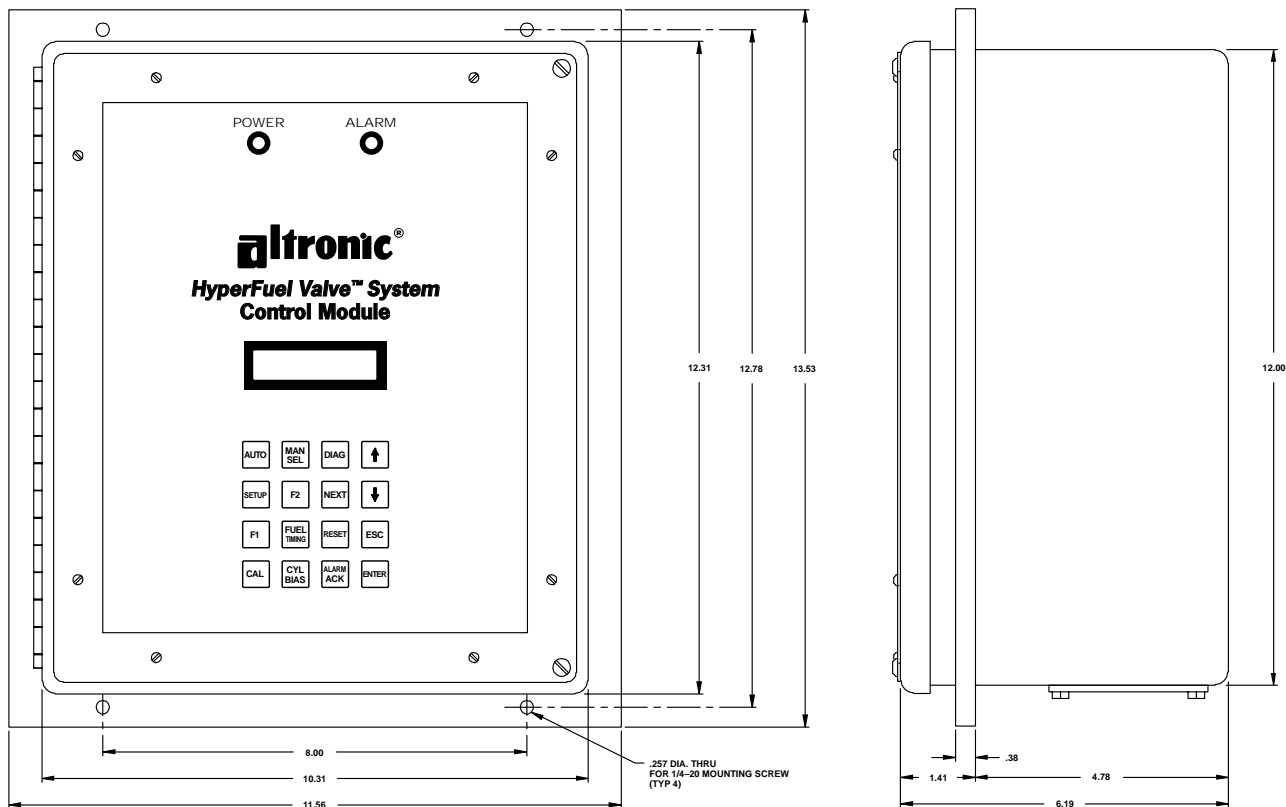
LOGIC MODULE MOUNTING DIMENSIONS
